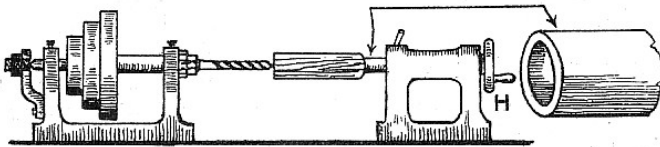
MANDREL OF LATHE FITTED WITH MACHINE TWIST BIT.
